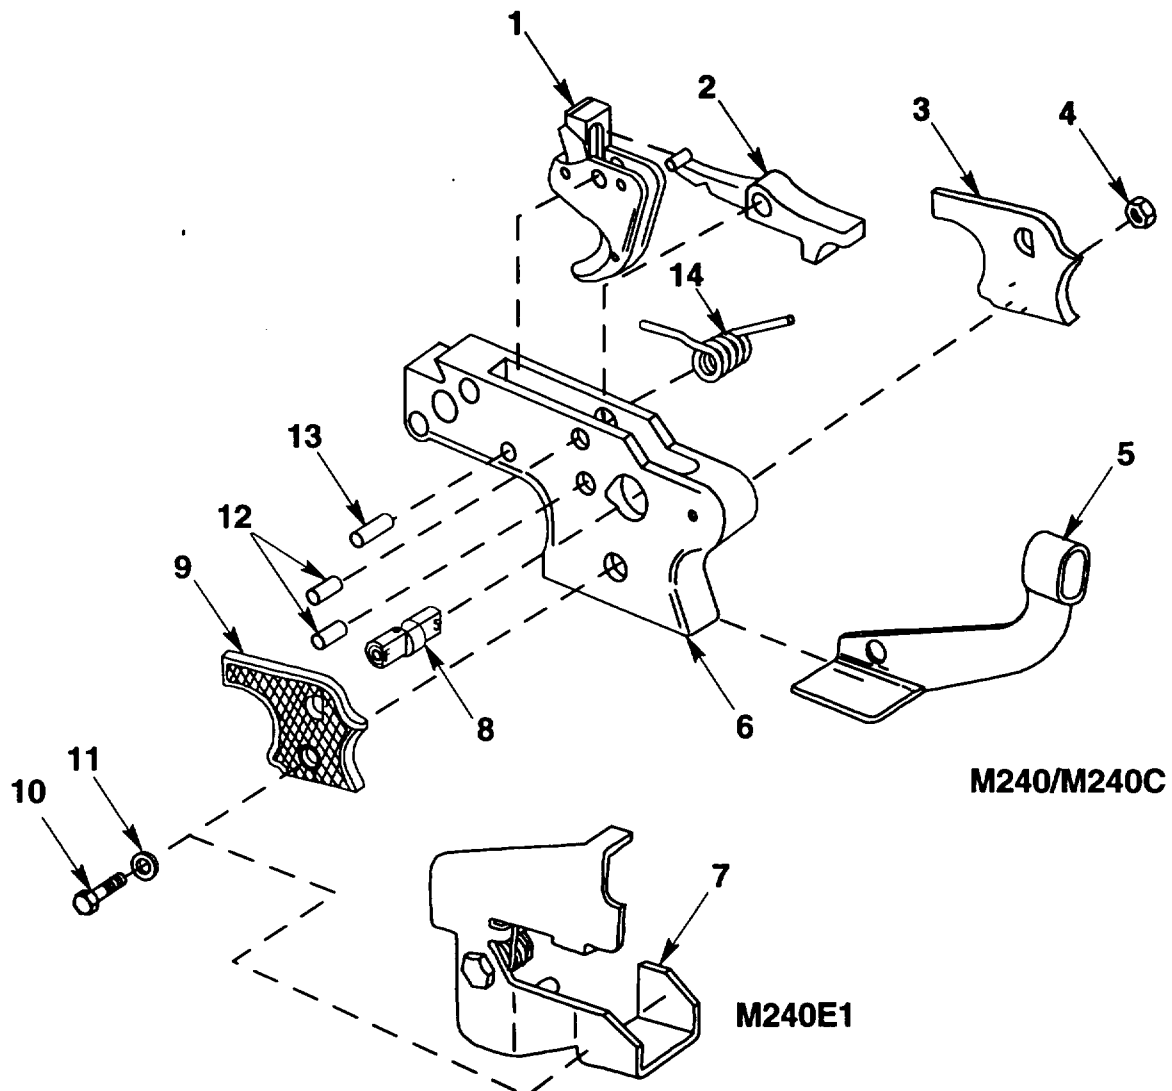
Trigger Housing Assembly, M240/1M240C, PN 11826230; M240E1, PN 12597070; Trigger Assembly, Infantry, M240B/M240G, PN 12976869 (Sheet 1 of 2)
